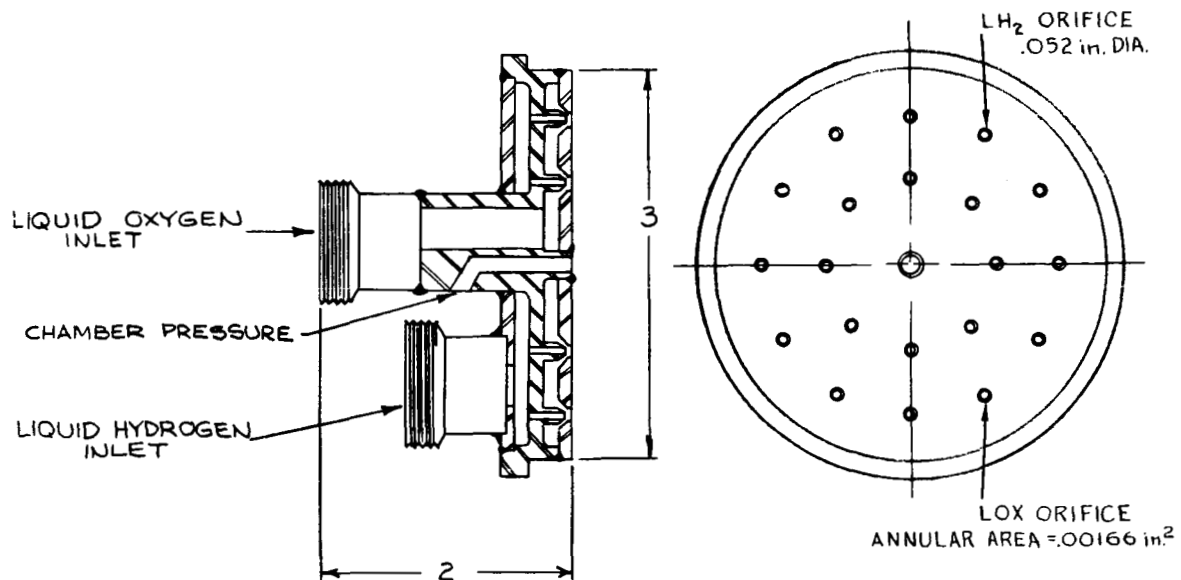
MULTI-COAXIAL INJECTOR ASSEMBLY
